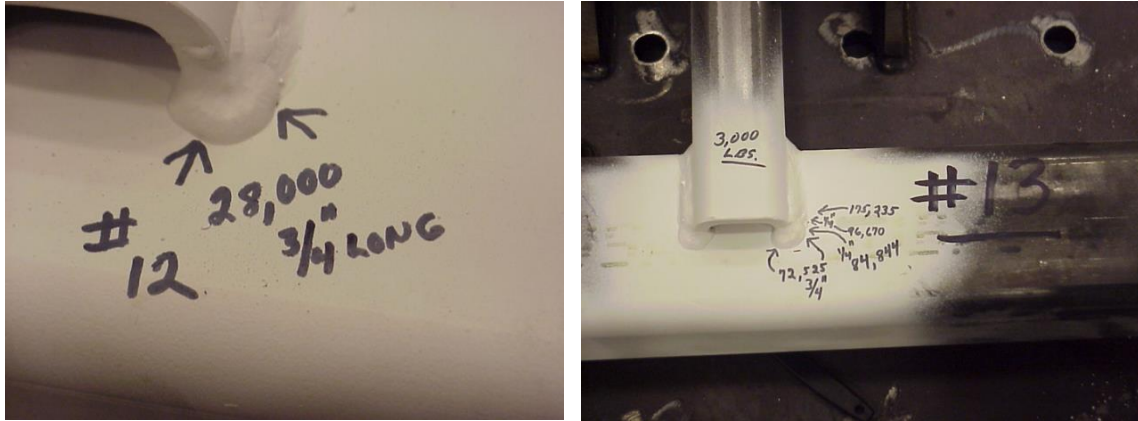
Fatigue crack in the base tube located in the region of estimated maximum stress (Sample#12 and Sample#13) of Tubular Weldment.
